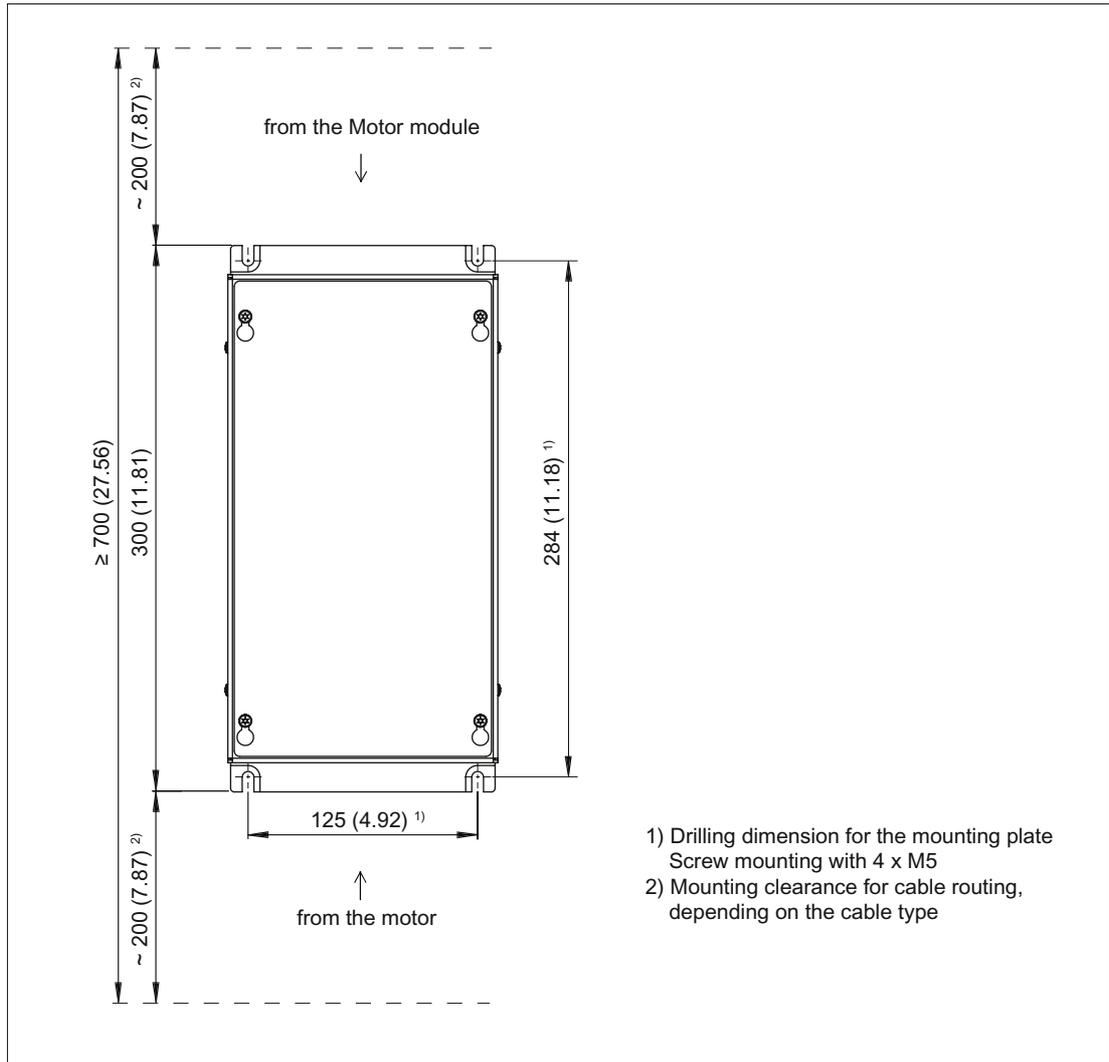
Mounting dimension for a Voltage Protection Module VPM120
